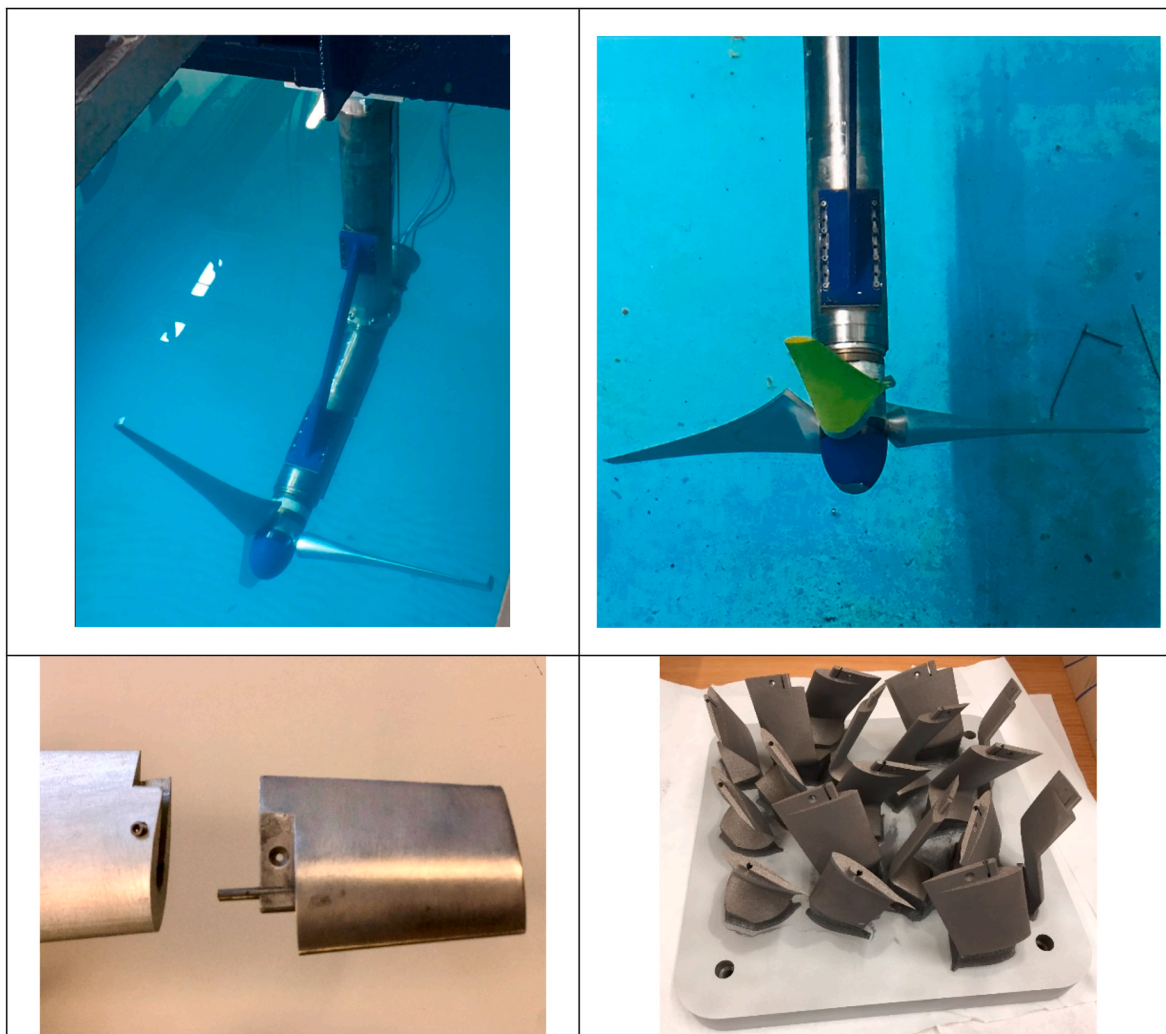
Turbine installed in towing tank (Top left), main blade (Top right), blade and winglet interface (Bottom left), 3D printed winglets (Bottom right).
